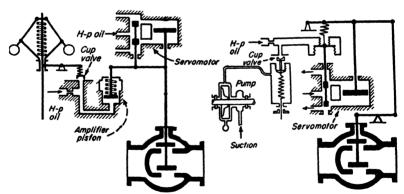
Centrifugal governing mechanism with double hydraulic-power amplifier using cup and pilot valves.
